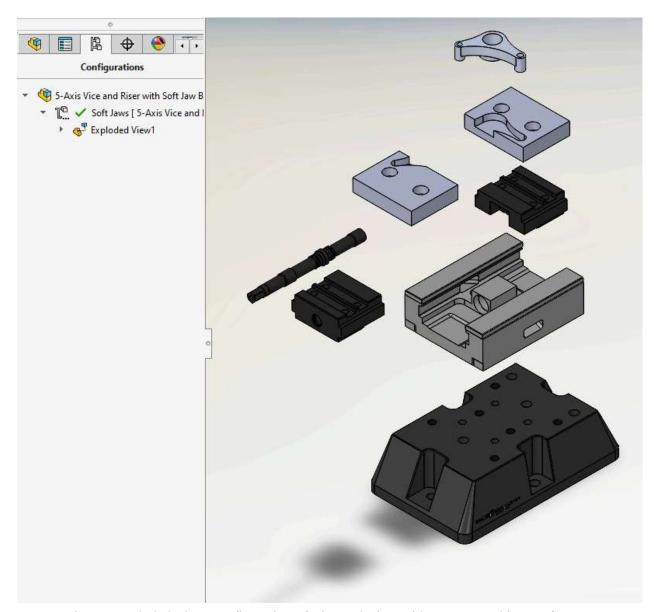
Exploded View Configuration of Vice and Riser with P1 Mounted into Soft Jaws
